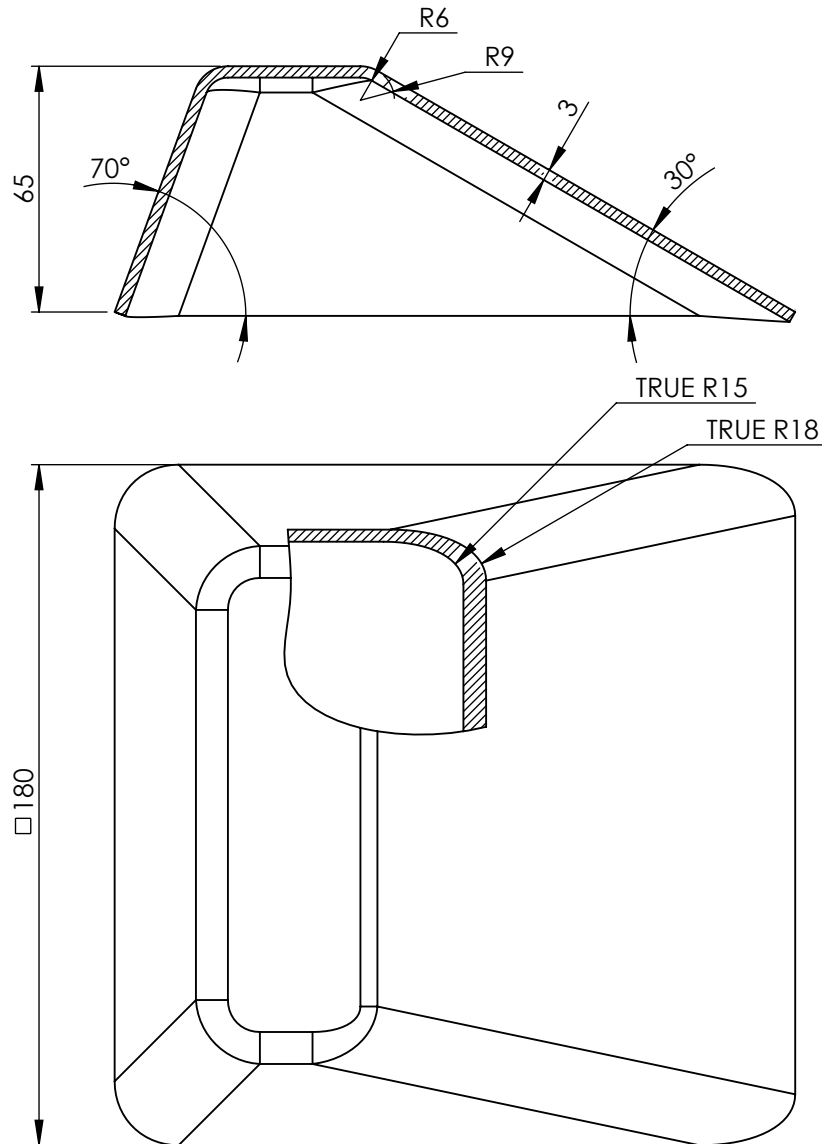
Part design for the SPIF rotomoulding concept validation with 3mm constant thickness to thermoform controlling either inside or outside surface, scale 1:2
